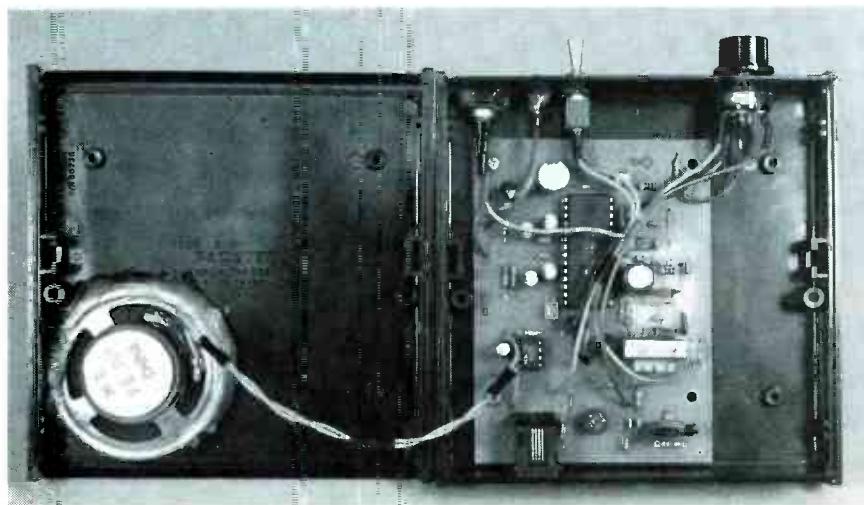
THE COMPLETED PROTOTYPE. The front panel included with the kit makes for a nice finishing touch.
